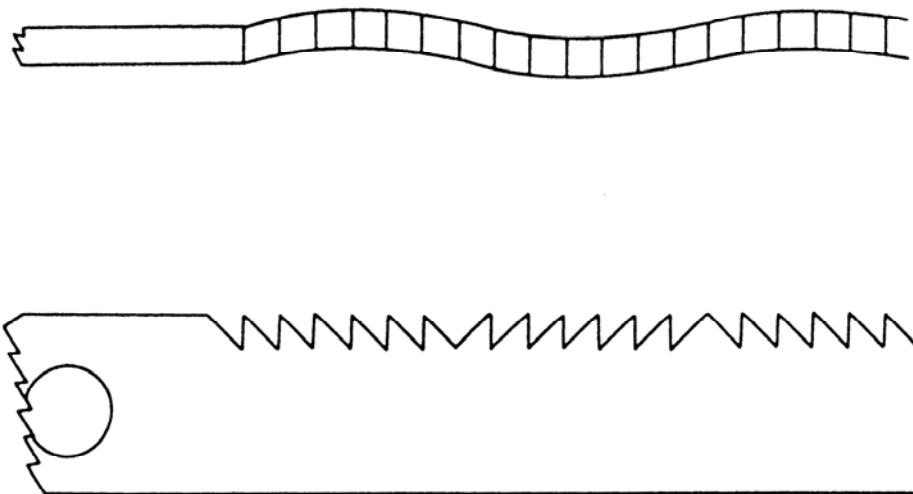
Sabre sawing: Alternating tooth blade for aramid/epoxy
